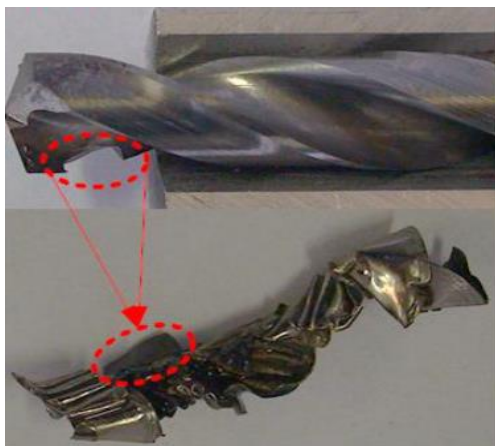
Welded chip on cutting tool - experiment No 15
